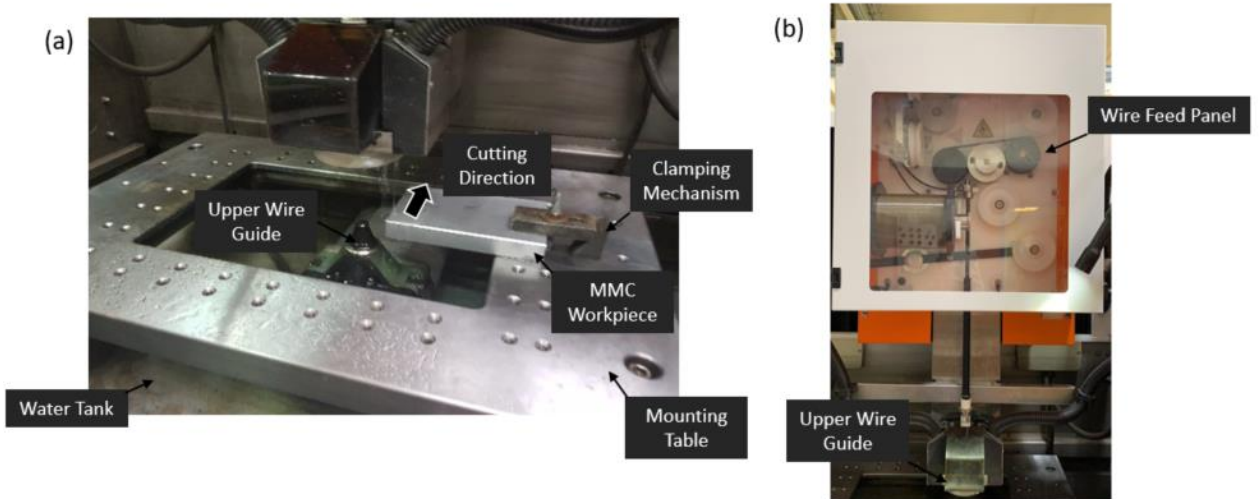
(a) Workpiece clamped on the mounting table and (b) setup of wire feeding system.
